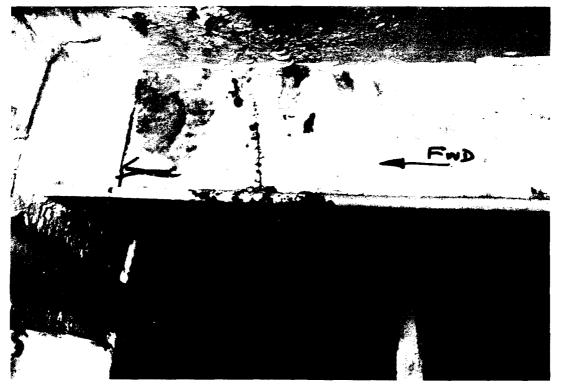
'ROTHESAY' CLASS: FAILURE OF WELD REPAIR IN 1 DECK GIRDER (H.M.S. 'PLYMOUTH')
